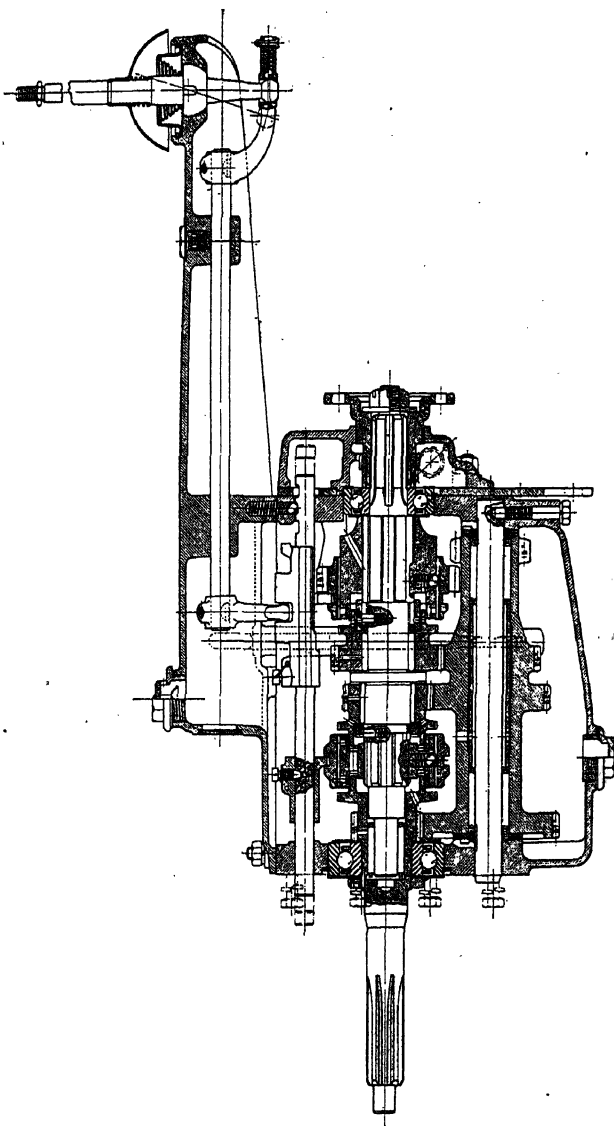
The Riley 12 H.P. Car Four-Speed Gearbox with Remote Control Gear Lever.
